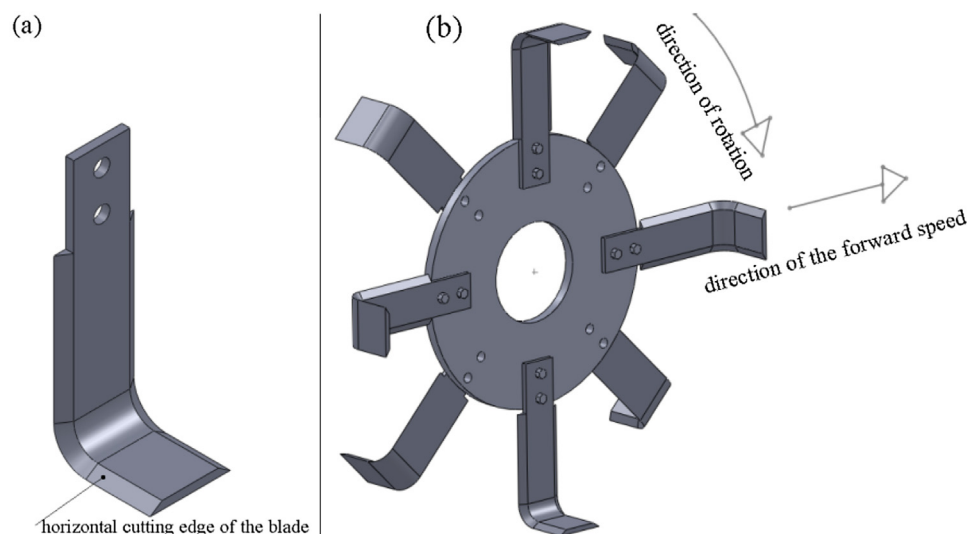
a) The shape of a blade b) the installation method of the blades on a flange.
